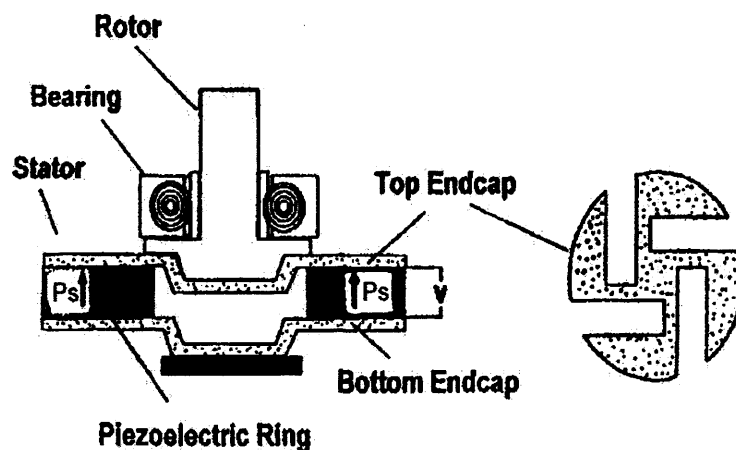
'Windmill' motor with a disk-shaped torsional coupler [12].
